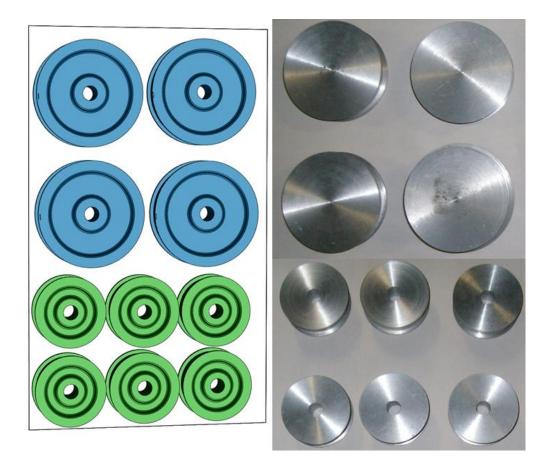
Figure showing the solid models and final machined products for the idlers and pulleys. (pulleys (top) and idlers (bottom) solid models on left, fully finished and machined castings on right)
